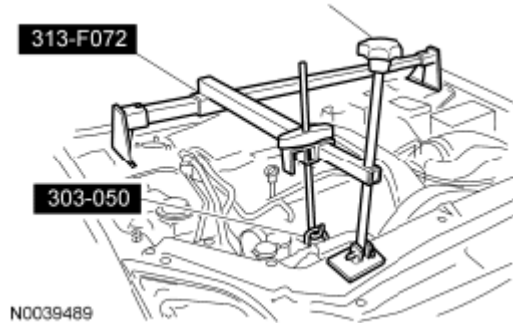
Identifying Engine Support Bar & Engine Lifting Brackets
